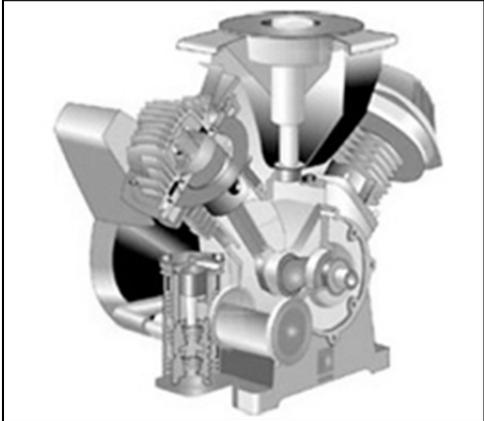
A picture indicating schematic of an industrial reciprocating compressor [WS49]
